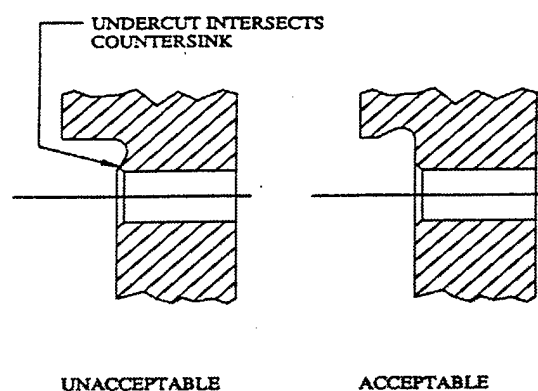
Crankshaft Mounting Hole Clearance (Courtesy of Cummins Engine Company, Inc.)
